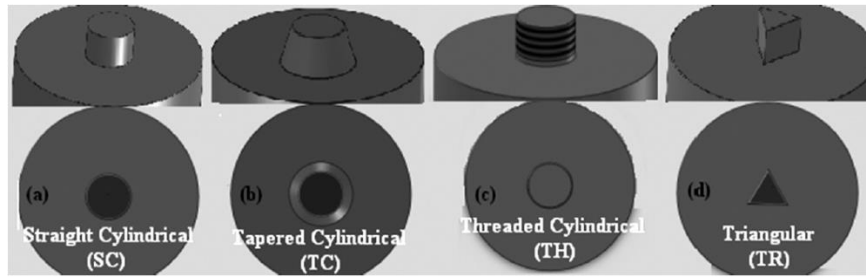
Tool pin profiles used in FSSW: a) straight, b) tapered, and c) threaded cylindrical, d) triangular [53].
